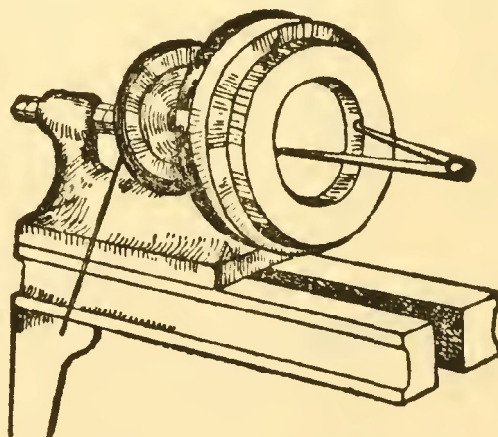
TESTING INTERIOR RECESS WITH INSIDE CALLIPERS.
